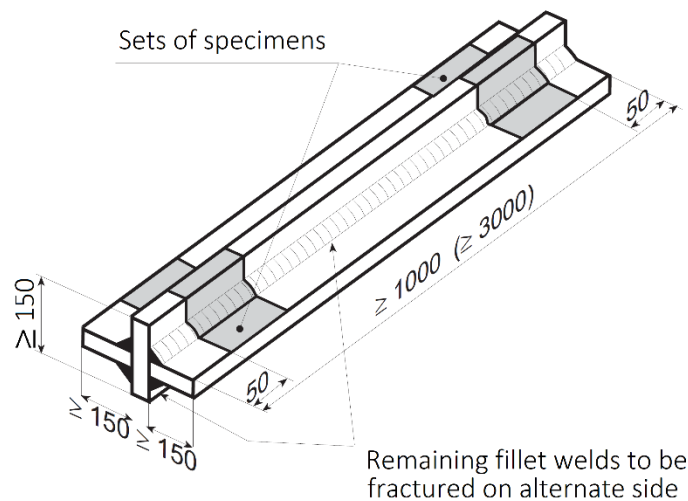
Double T-joint (cruciform) test pieces for automatic welding procedures
